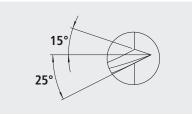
The asymmetric thread guarantees better pull-out and stripping resistance.
